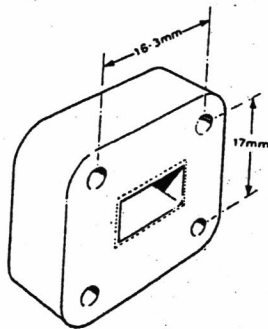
General purpose waveguide flange. The holes are 0.144in for either 4BA or M3 bolts. The waveguide is central with respect to bolt holes. Overall dimensions are not critical
